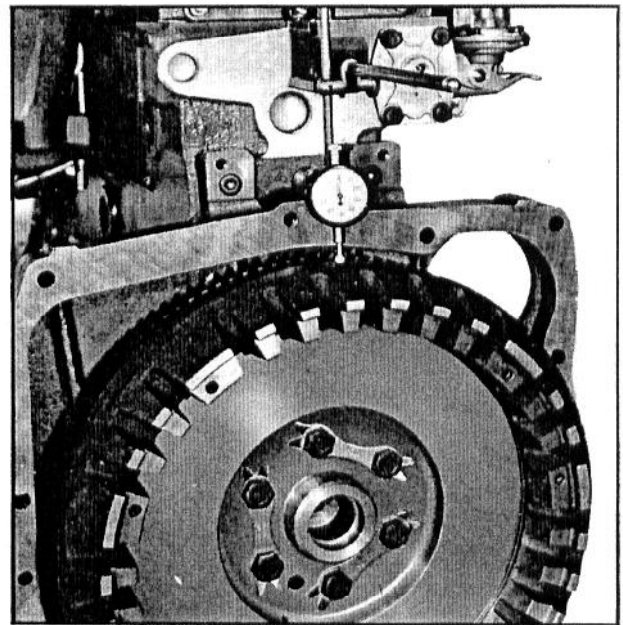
Measuring Run-Out on Outer Diameter of Flywheel
